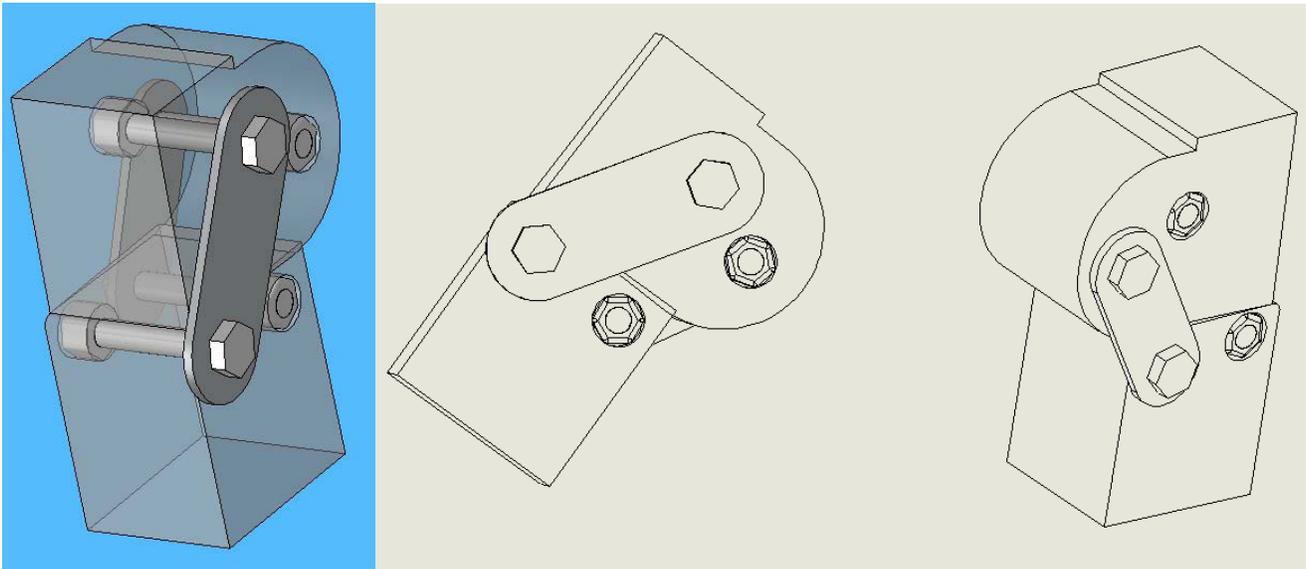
Completed Assembly for Single Linkage Knee. This assembly includes two high-density polyethylene blocks, two steel linkages, four bolts, and four lock nuts. The pieces to be manufactured are described in Figures 2 through 5.
